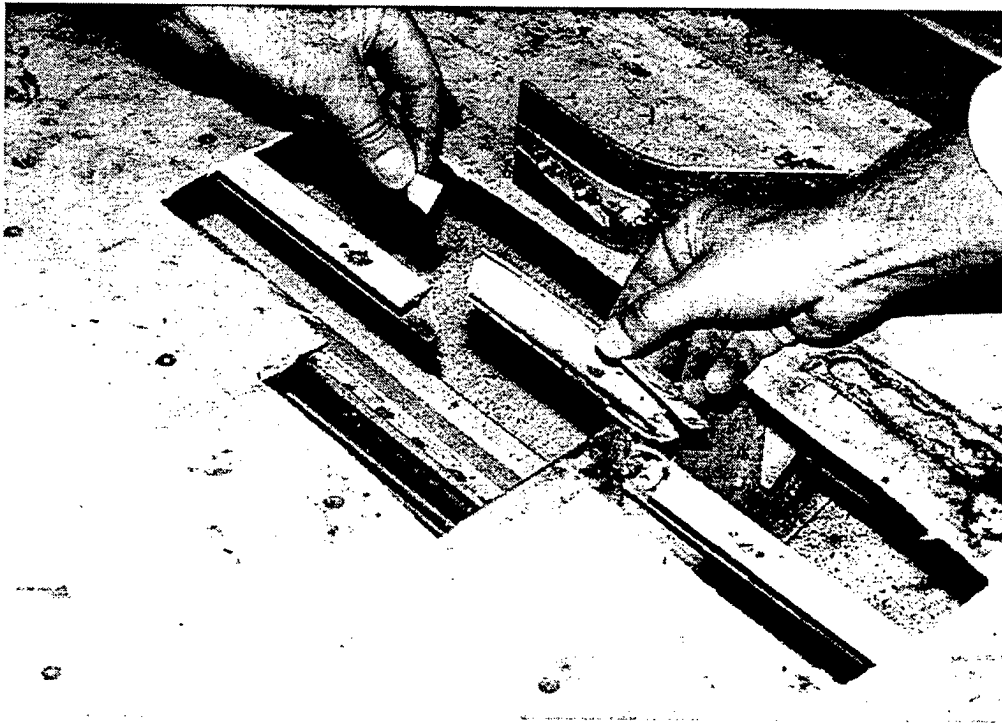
POSTTEST AUXILIARY FUEL TANK LOWER LEFT BRACKET
